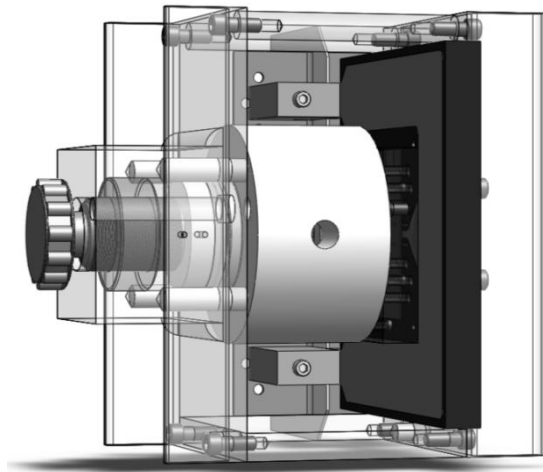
Single sided, E-type coil welding setup. Support frame transparent for clarity.
